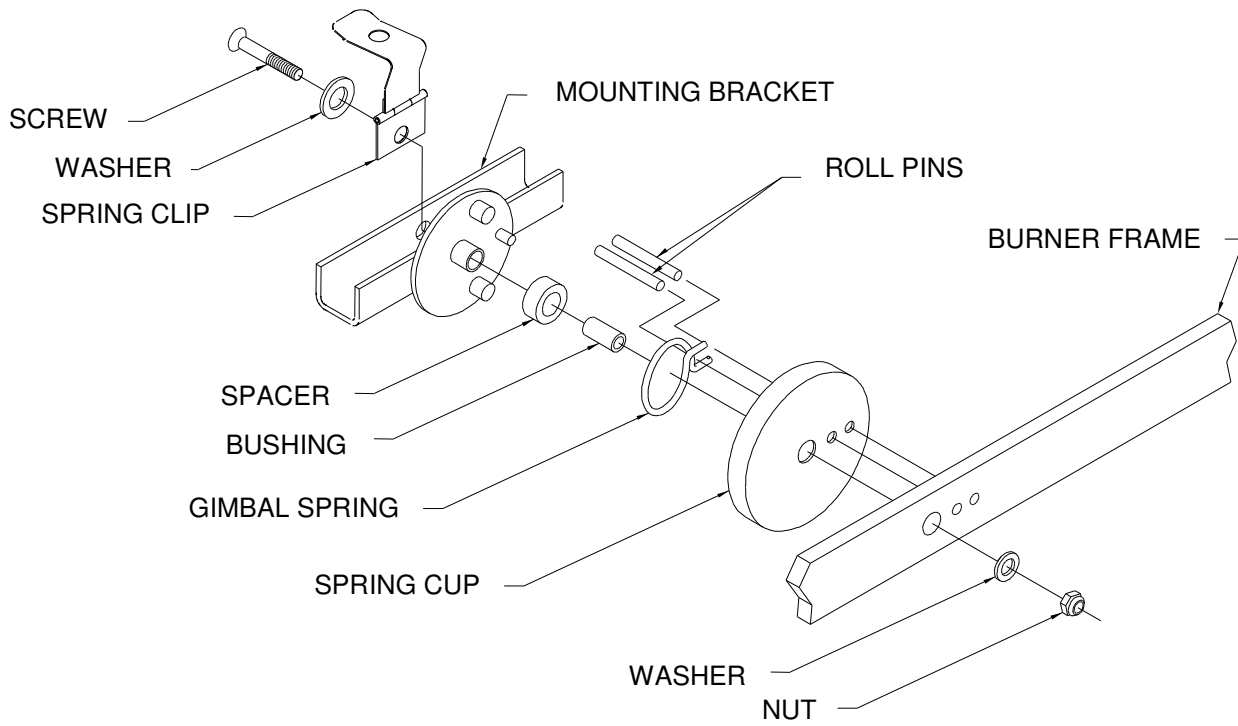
C – Gimbal Spring & Pivot; ELS
